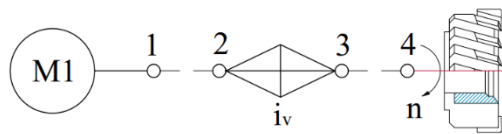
Speed kinematic chain of 3-axis portable milling machine
